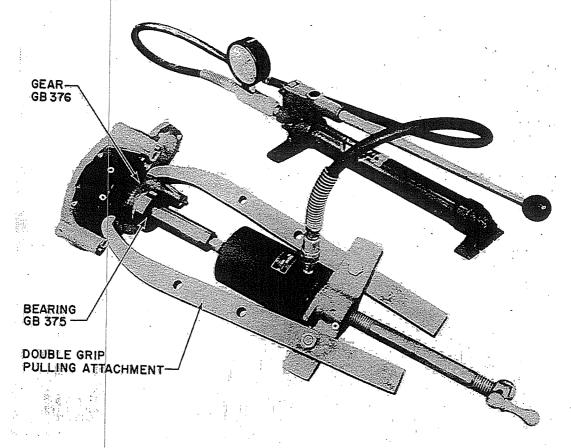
1 to 1 Shaft, Removal of Gear GB376 and Bearing GB375
